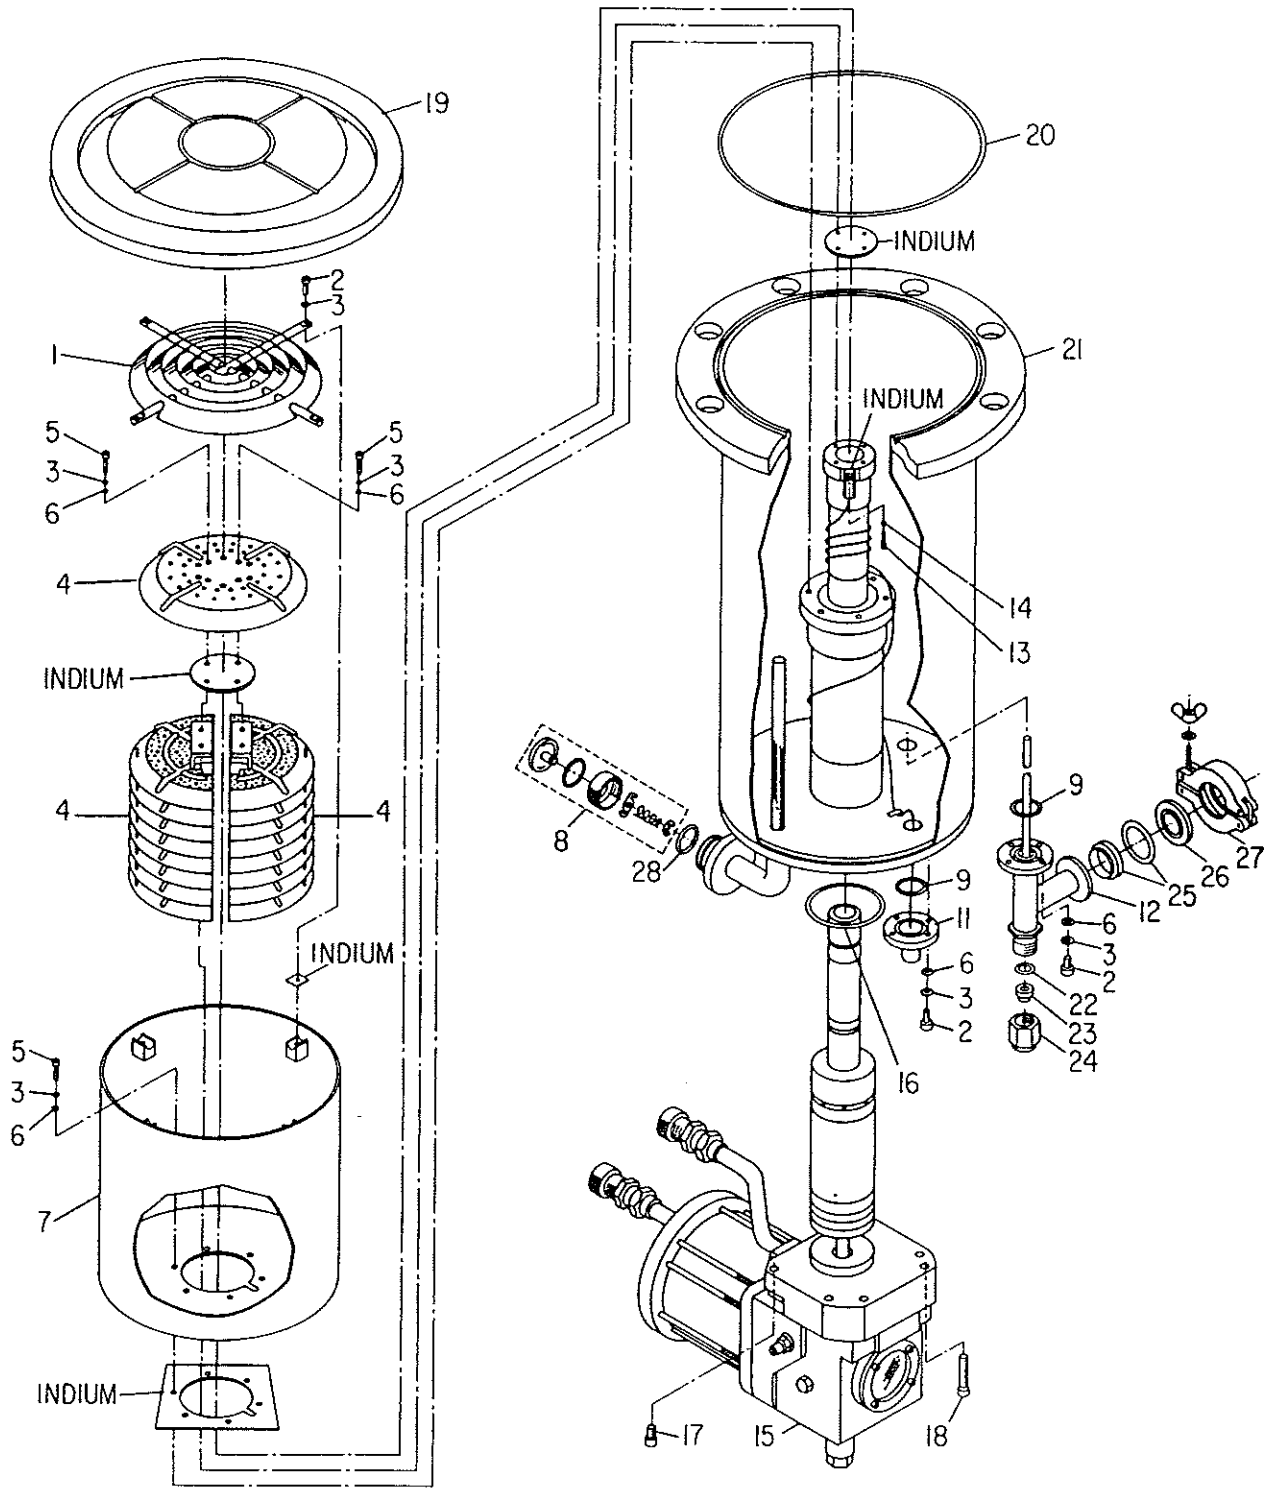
Exploded view of Cryo-Torr 8 Cryopump
